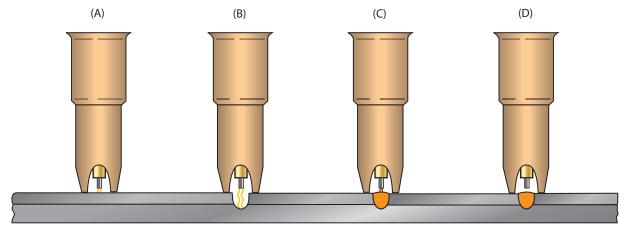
GMA spot weld: (A) the arc starts, (B) a hole is burned through the first plate, (C) the hole is filled with weld metal, and (D) the wire feed stops and the arc burns the electrode back.
